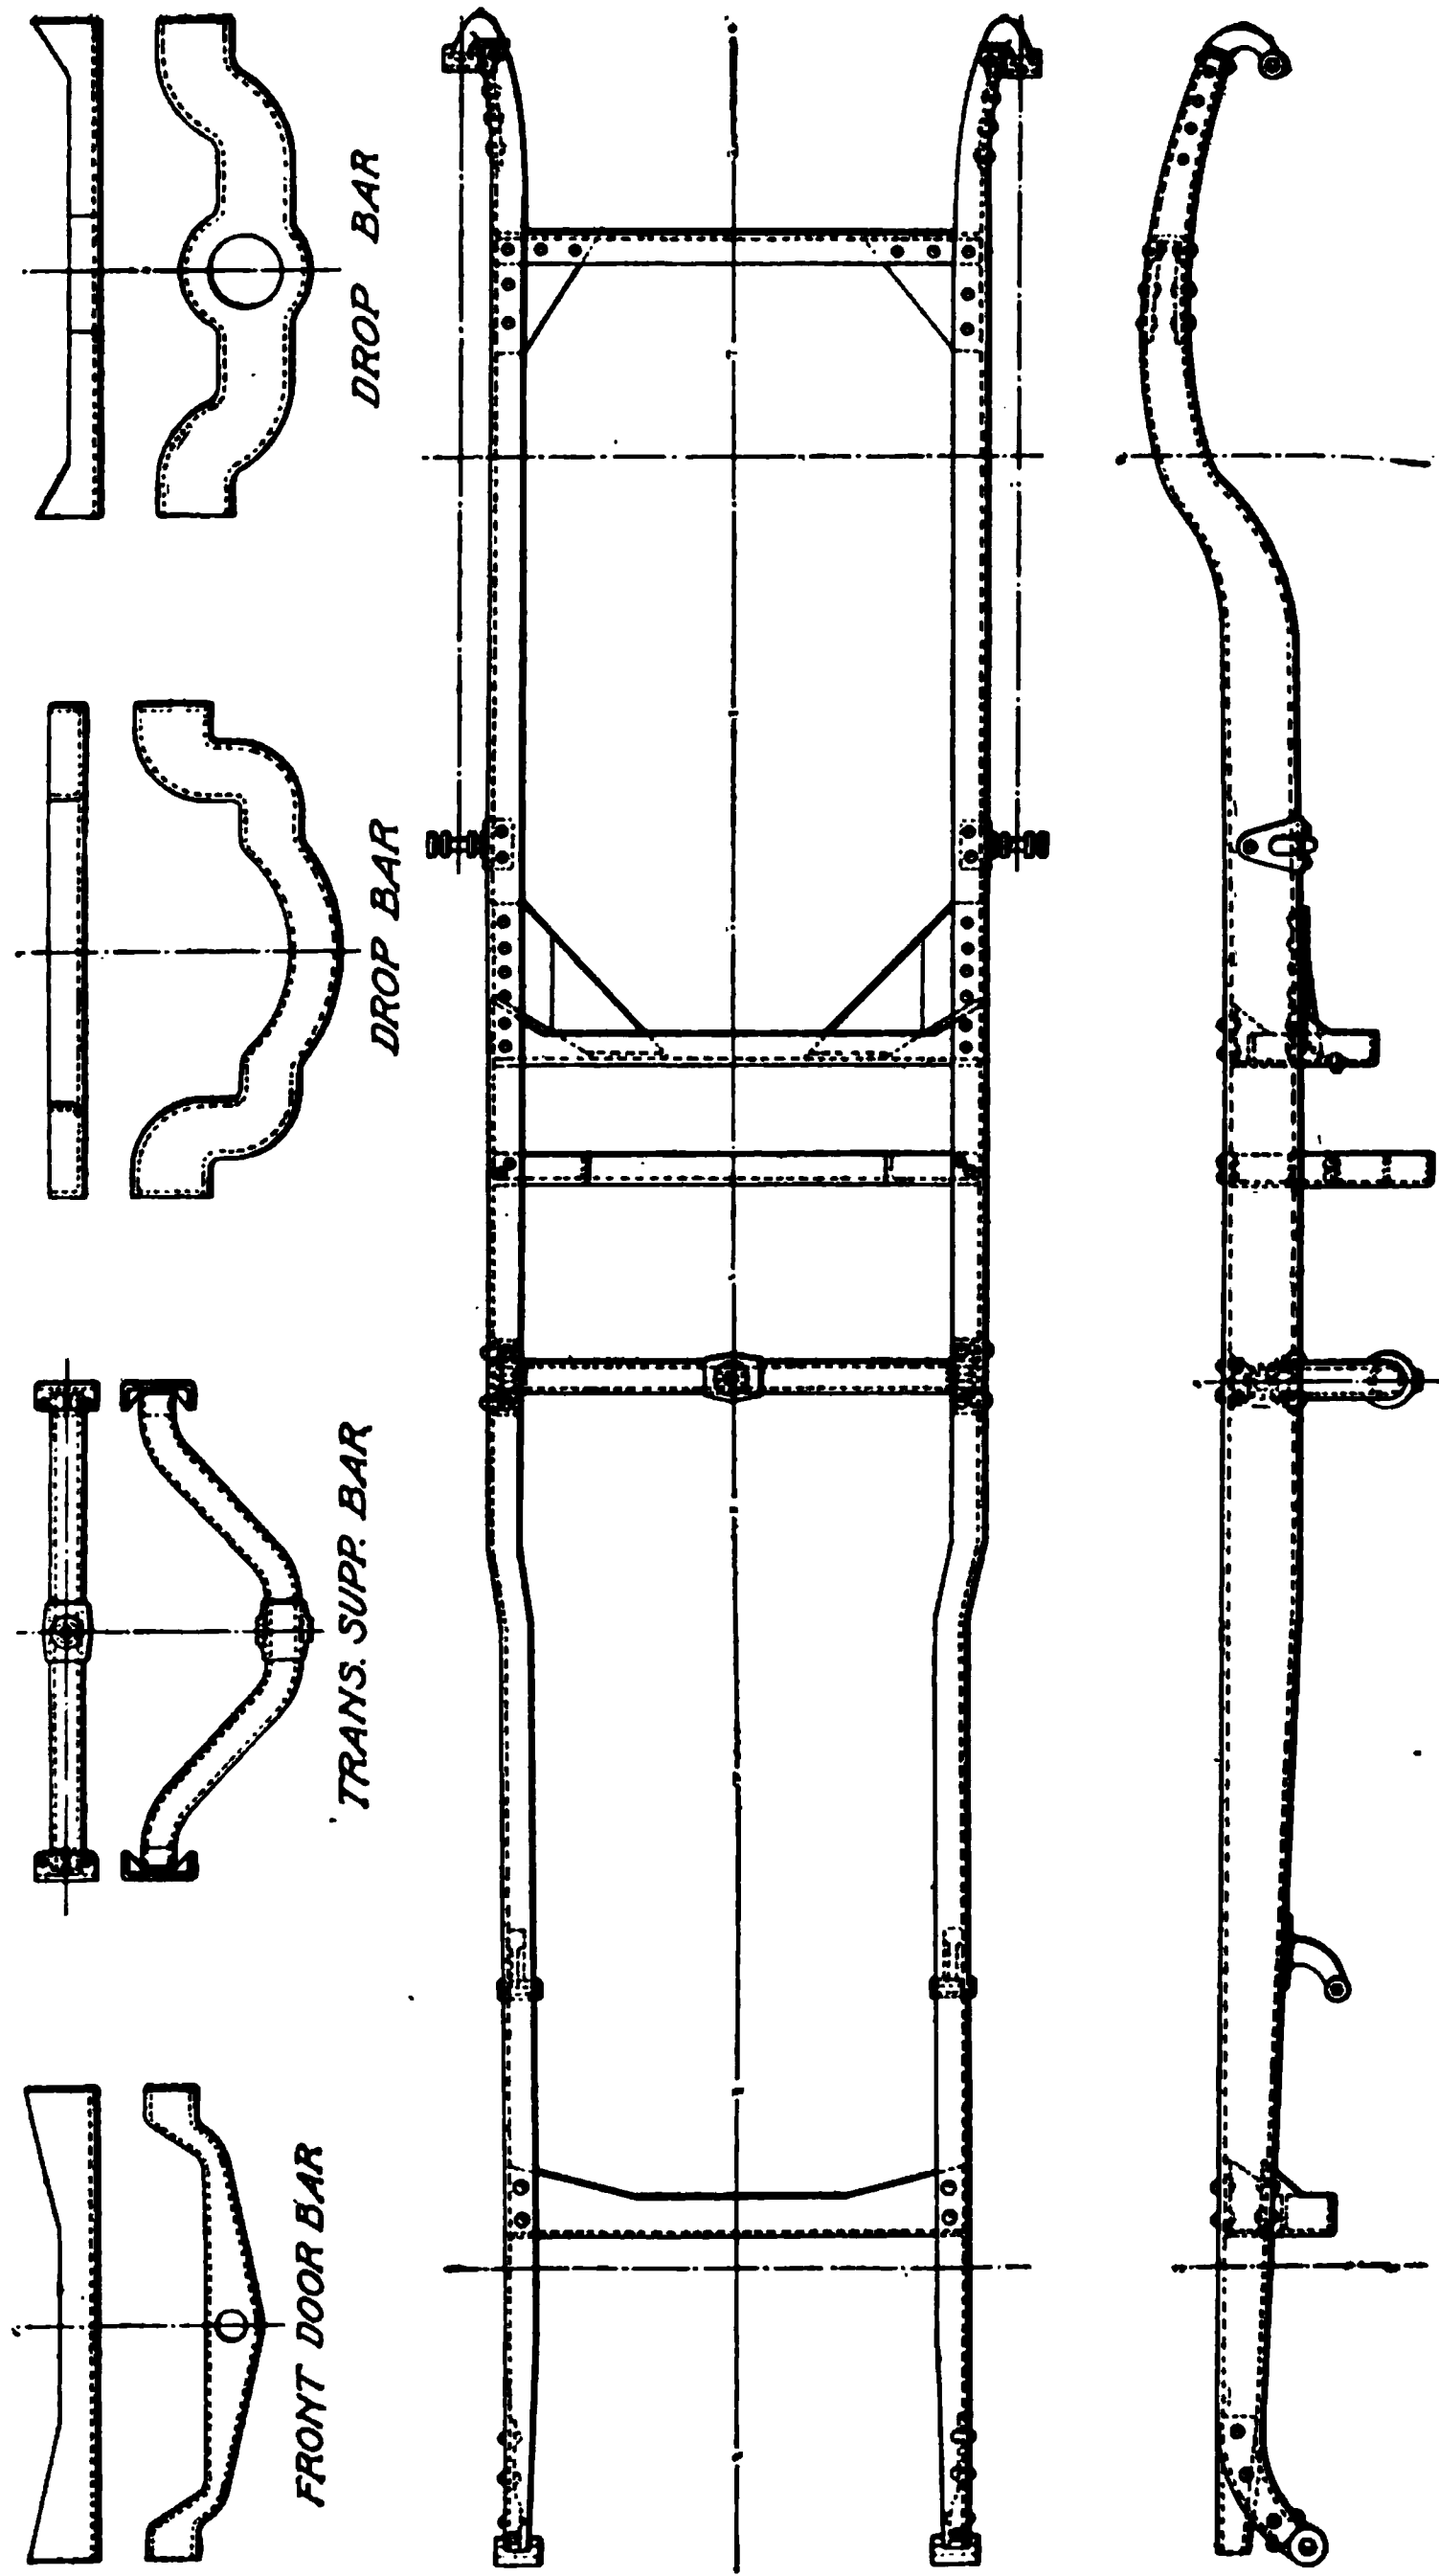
Plan, Elevation, and Sectional Details for Chassis Frame with Narrowed Front
